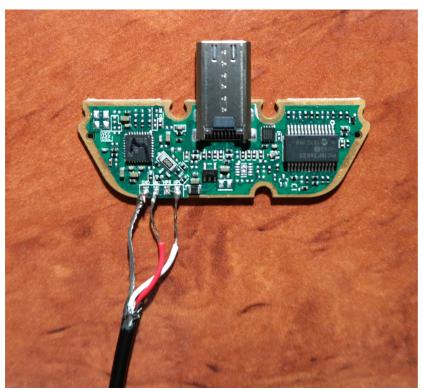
Small circuit board (XB1 chat adapter) with already soldered wires.
